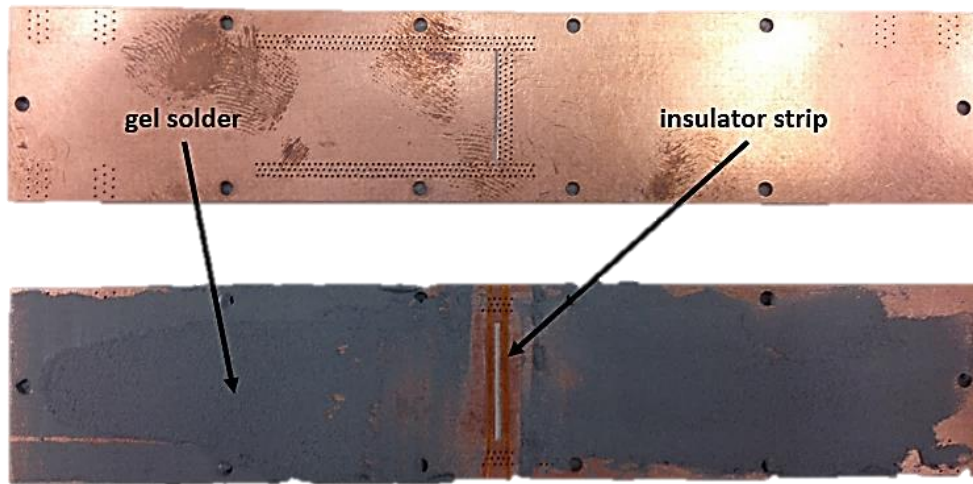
2-way divider layers with gel solder and insulator strip
